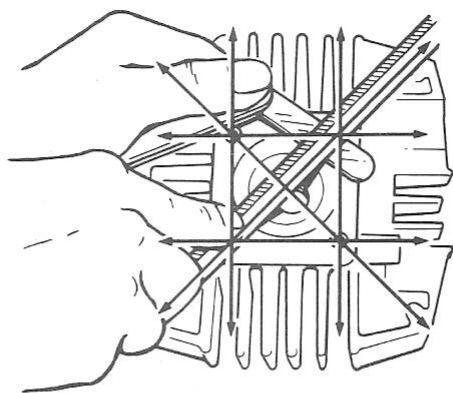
A.2 Check the head for warpage by laying the straightedge in the directions shown and trying to slip the specified feeler gauge under it at the gasket mating surface (Sec 7)
